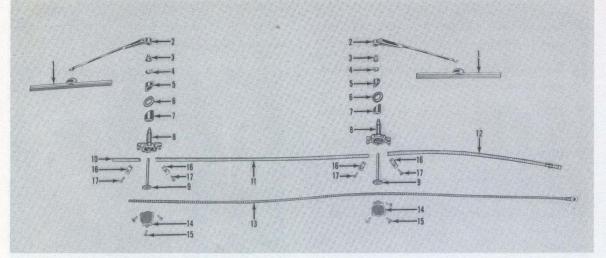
A-Windshield Wiper Cable and Attaching Parts.
